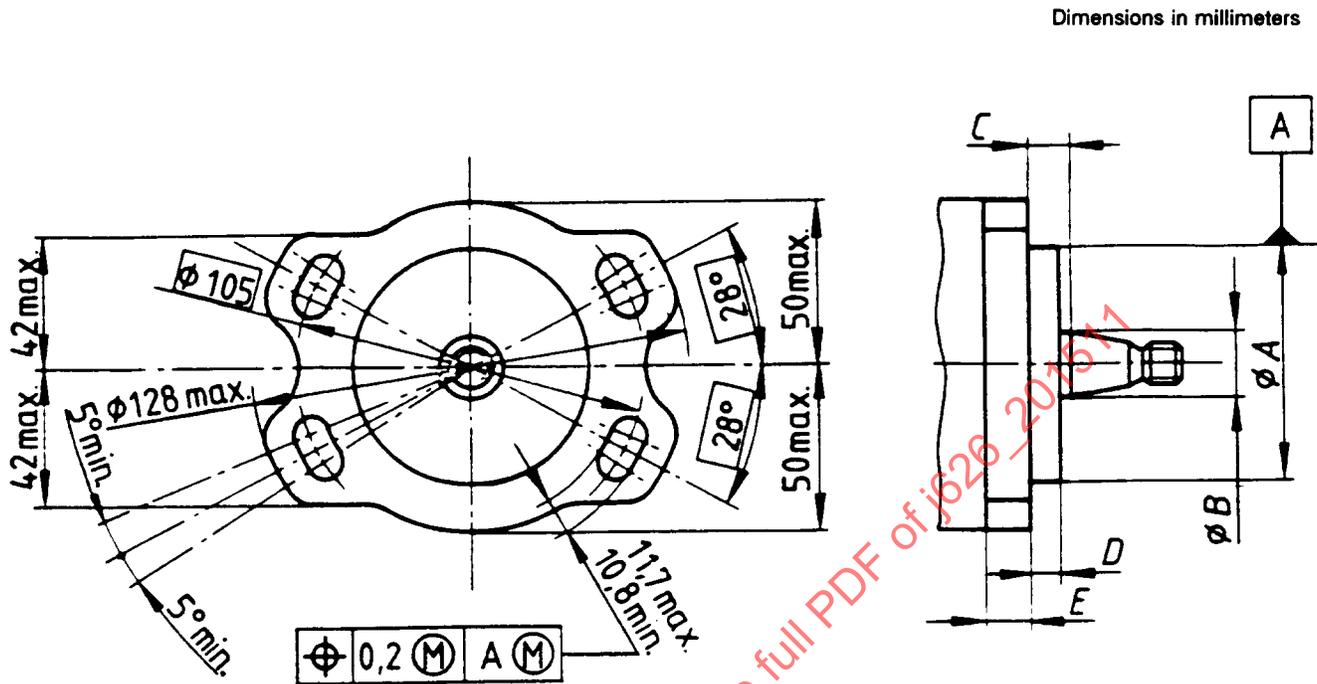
FUEL INJECTION PUMPS—TYPE 3 END-MOUNTING FLANGE
